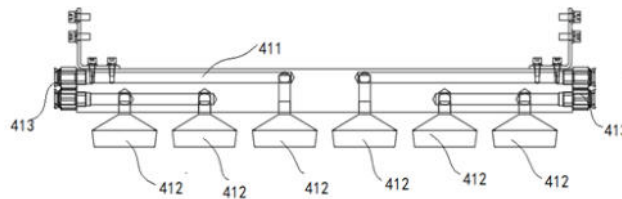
Schematic diagram of the dust removal assembly of the inner chain plate
